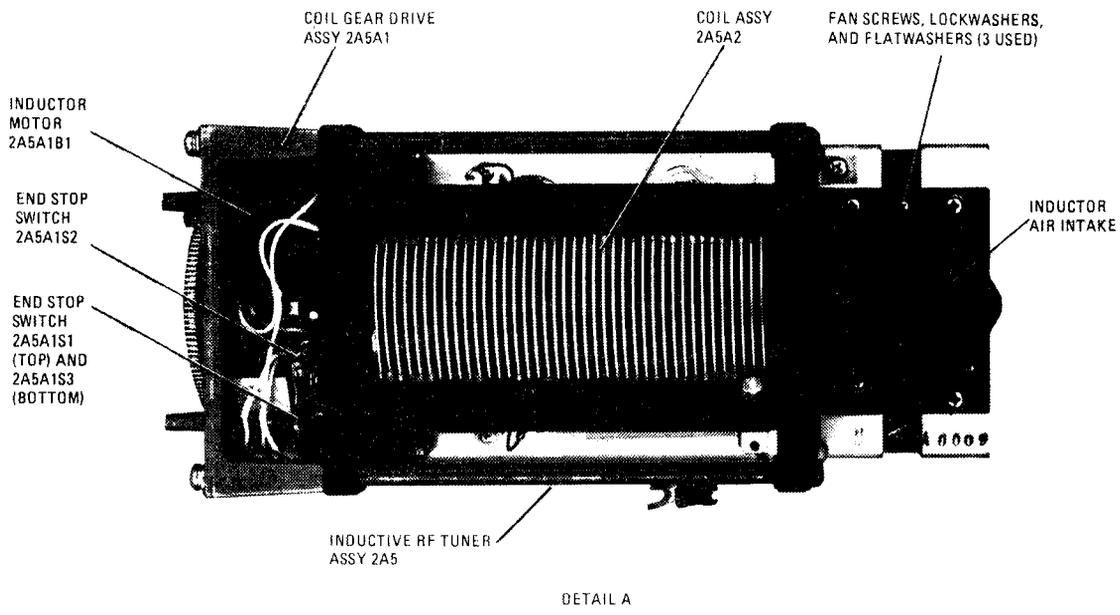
Inductive RF Tuner Assembly 2A5 - Component Details
